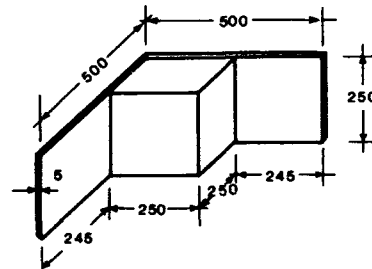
Cube with additional shadowing surfaces forming a double dihedral, dimensions in mm.
